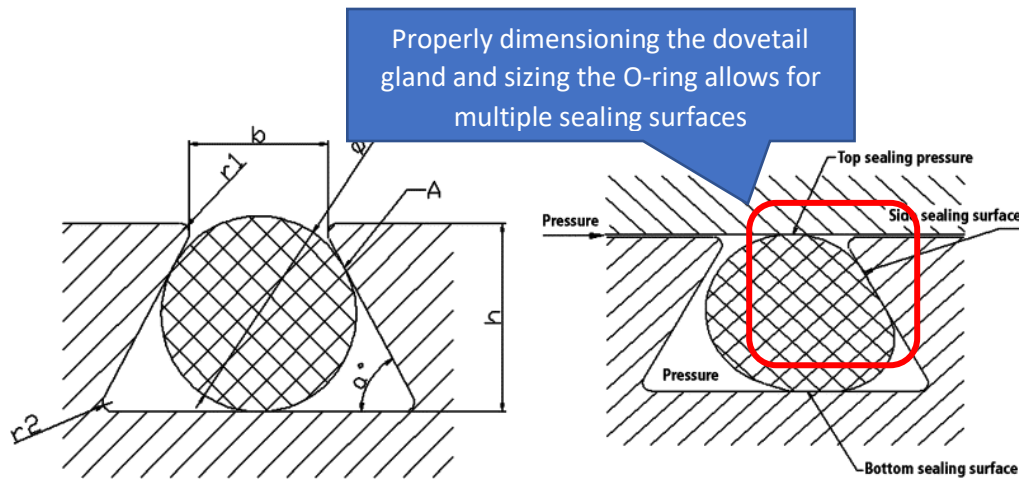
Cross-Section of Dovetail Gland with O-Ring Seal
